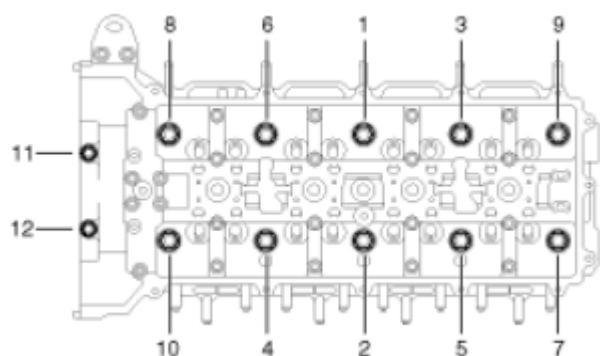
Identifying Cylinder Head Bolts Tightening Sequence (LH)
